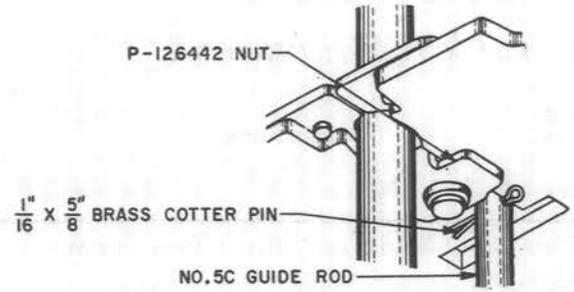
No. 3A Bearing Parts and Guide Rod
